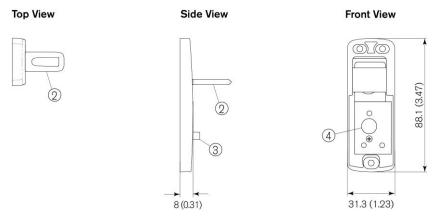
Dimensions of the GAT NET.Lock BoltSet 7100 (dimensions in mm – inches in brackets)
